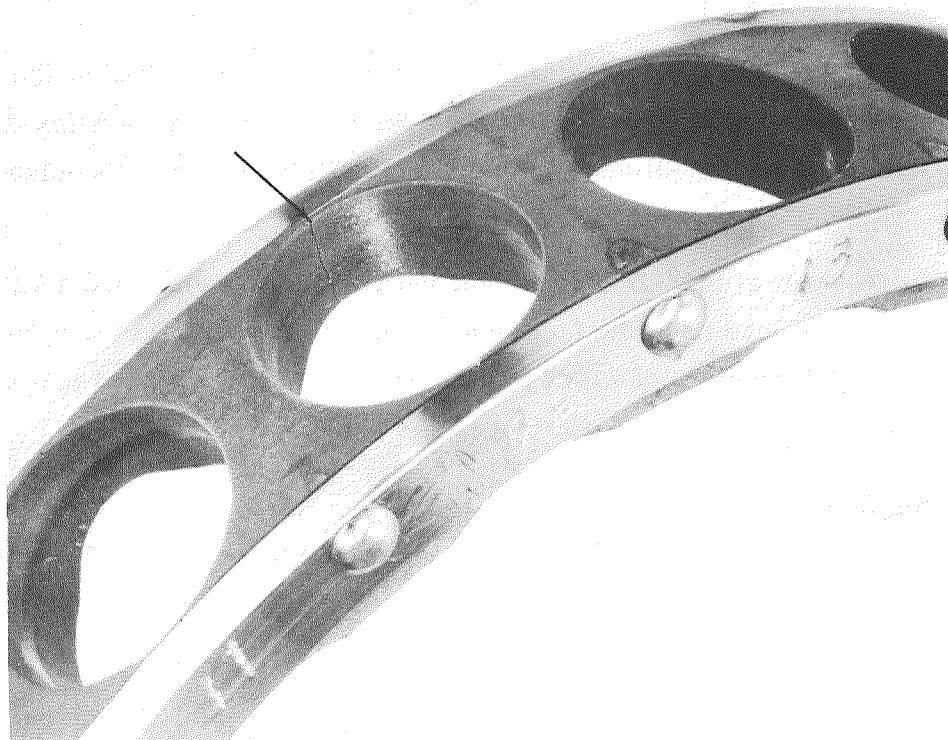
Cage L6, Wear and Typical Radial Crack Test No. 16A and 16B
